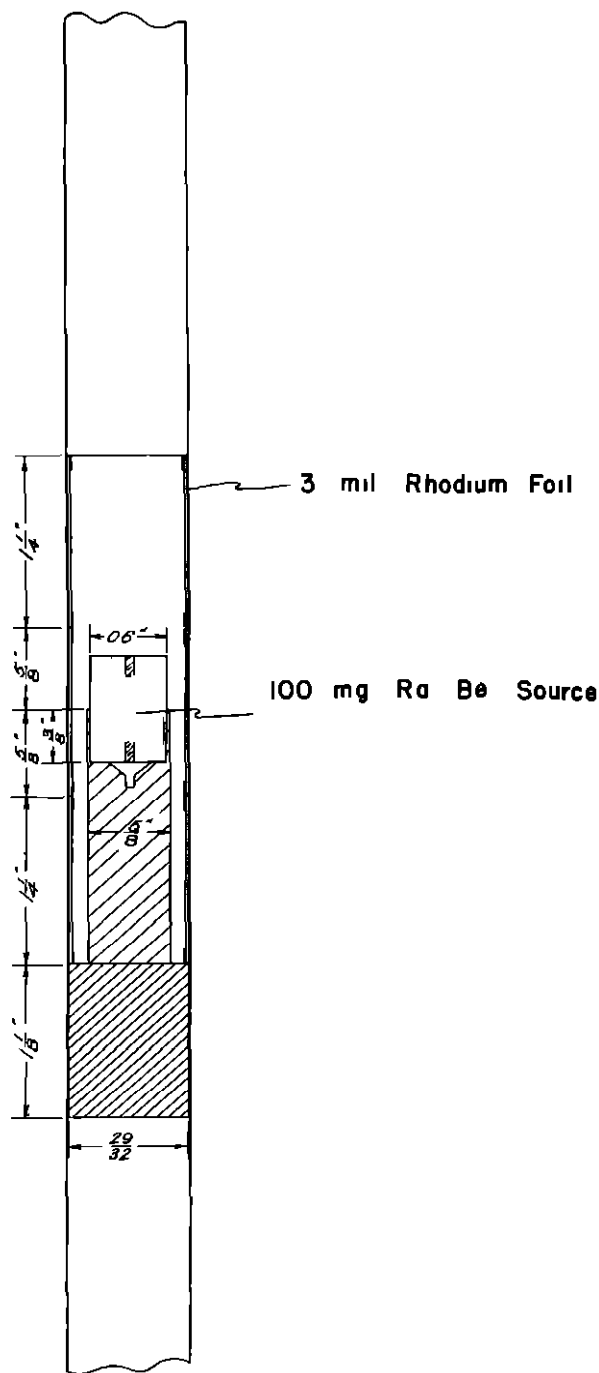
Assembly of Neutron Source and Detector Foil Holders Within a Tube Section
